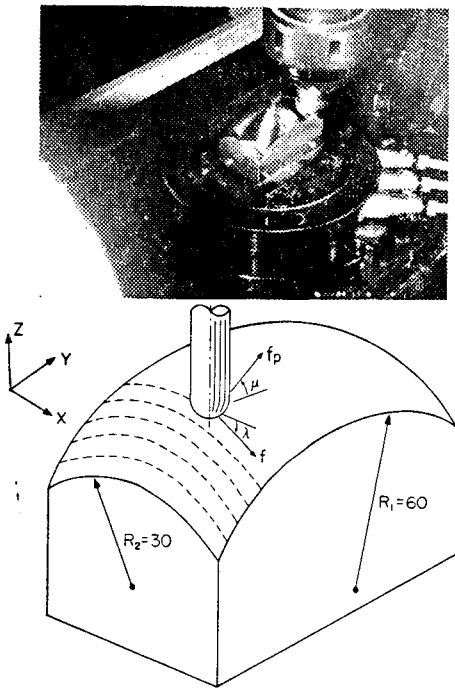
Cutting force measuring process in three-dimensional surface machining
